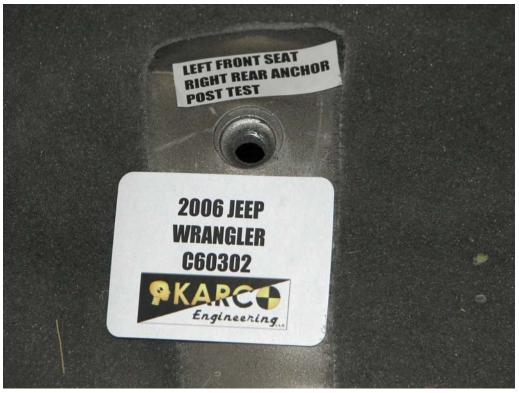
Floor Pan Anchor, P1, Post-Test
